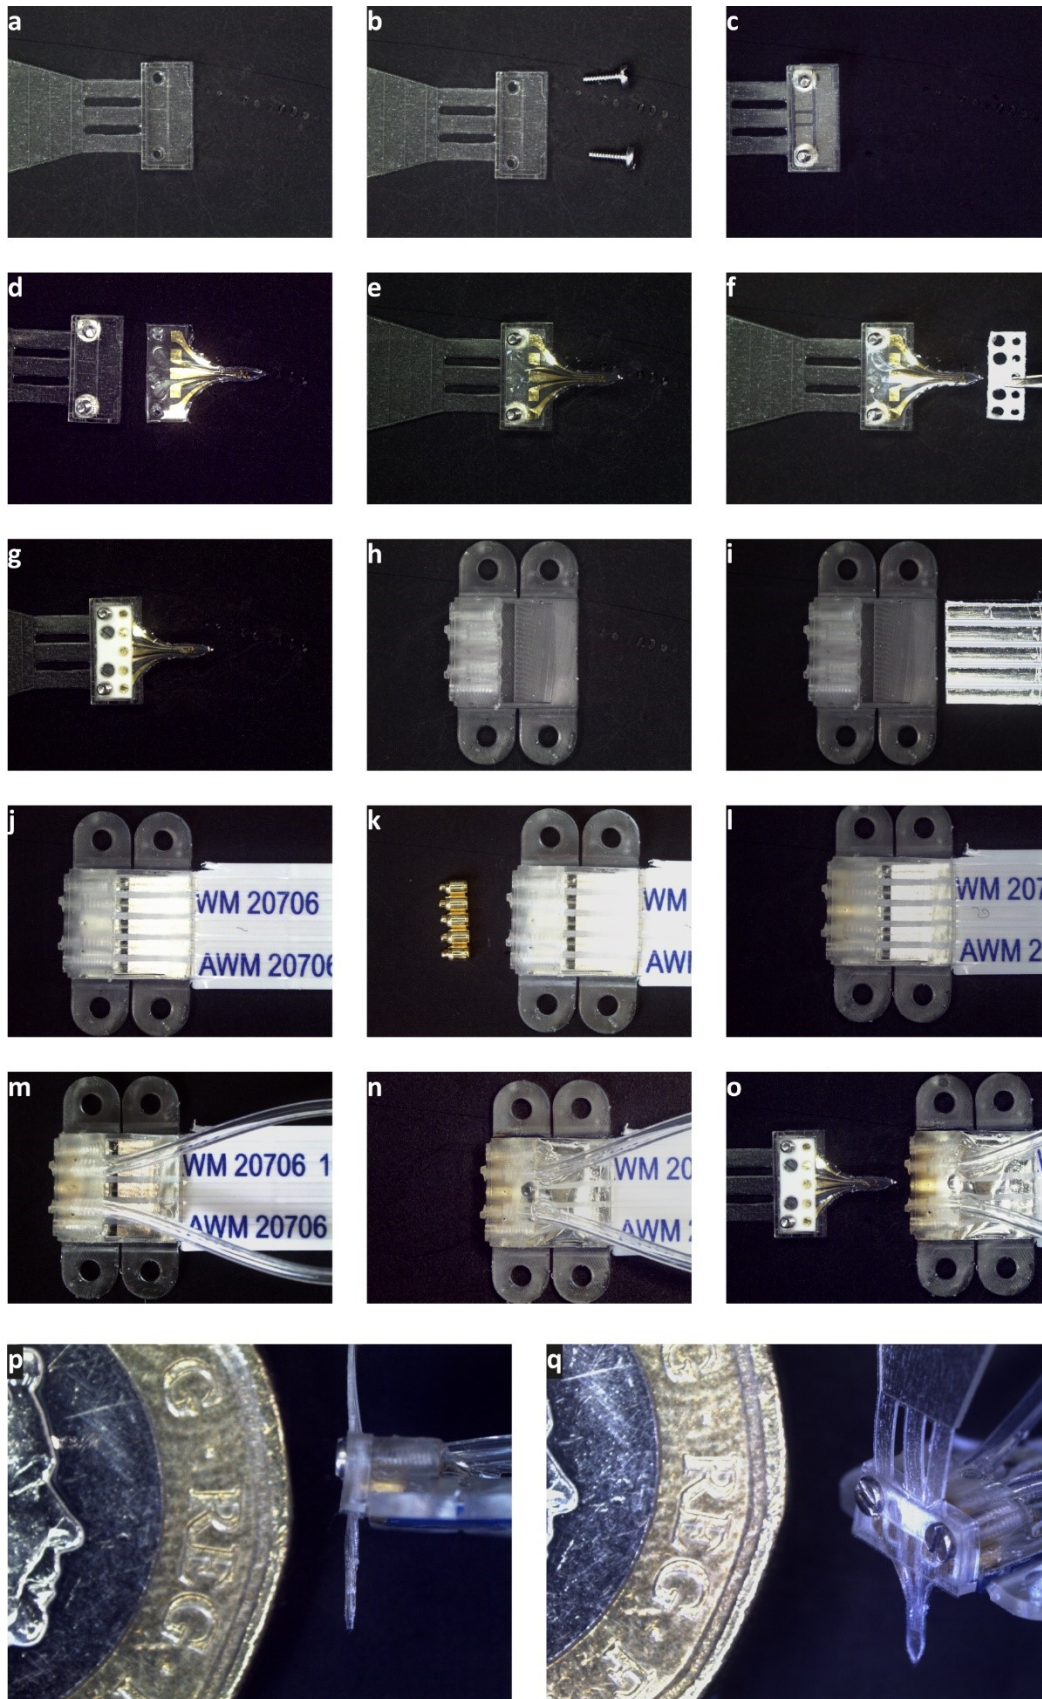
Heterogeneous integration of the implant: a 3D printed socket; b and c assembly of M0.6 machine screws into socket; d-e assembly of the hybrid fabricated probe; f and g assembly of the double-sided adhesive tape; h 3D printed electro-fluidic interface; i and j insertion of the flex cable; k and l insertion of the pogo pins; m and n insertion of 1/32" polyethylene tubing and encapsulation with low-viscosity UV curable resin(BV-007); o merging of interface with probe; p side view and q perspective view of the assembly with 1 pound sterling coin for scale.
